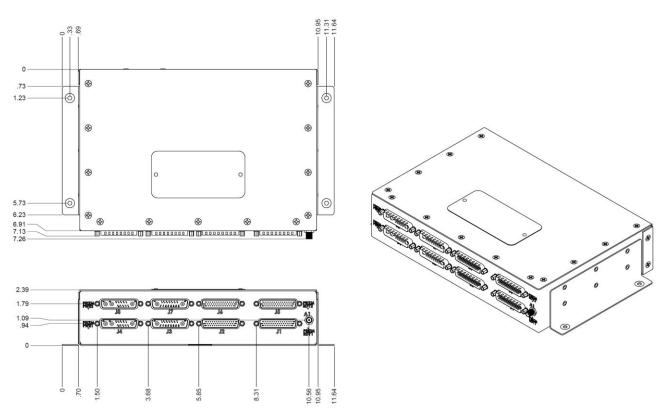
PRIZM -52 Dimensions and Mounting Dimensions
